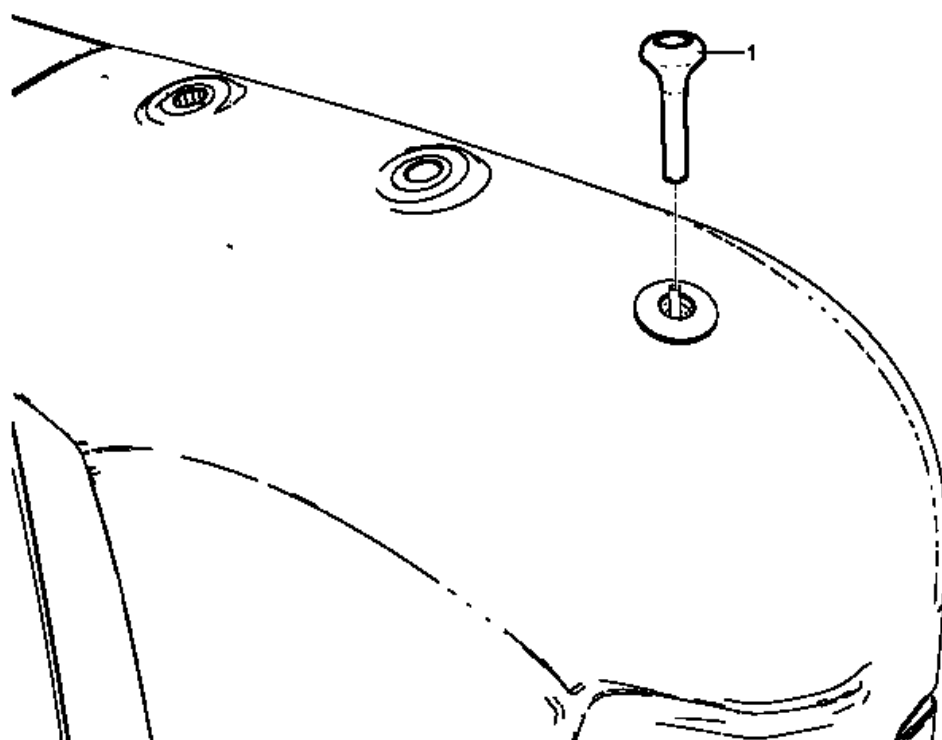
Rear Seat Back Cushion Latch Release Handle
